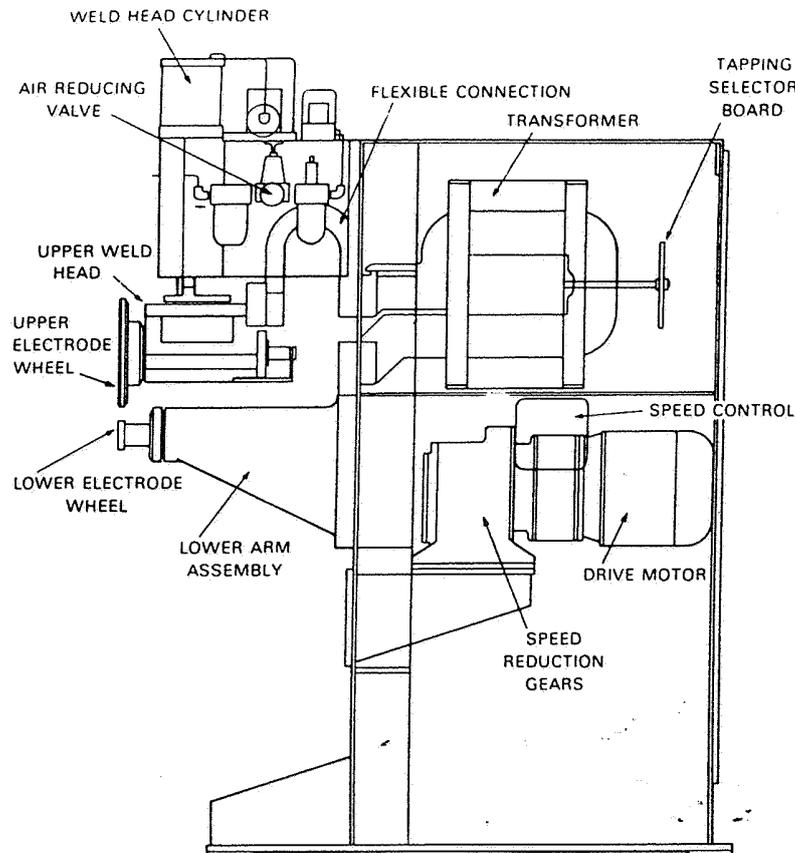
CIRCUMFERENTIAL SEAM WELDER
